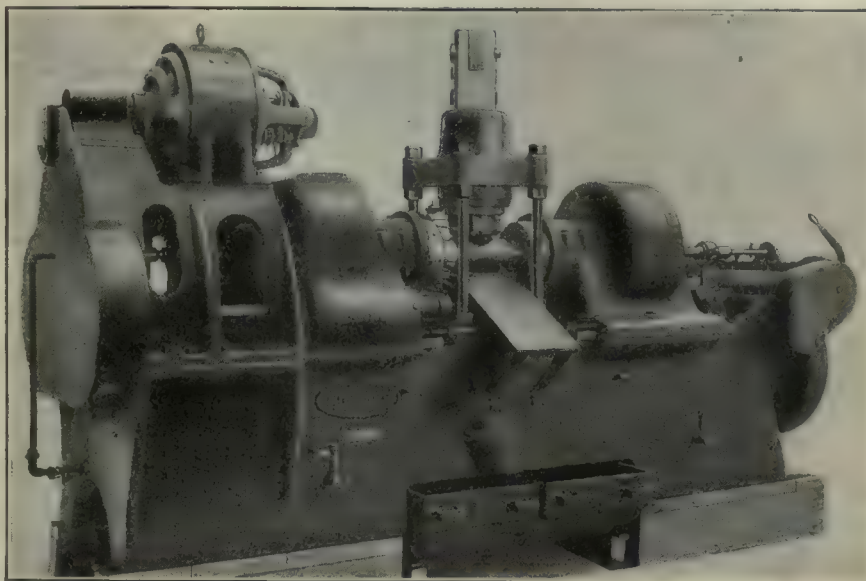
BULLARD MACHINE FOR BORING LARGE PIPE COUPLINGS
